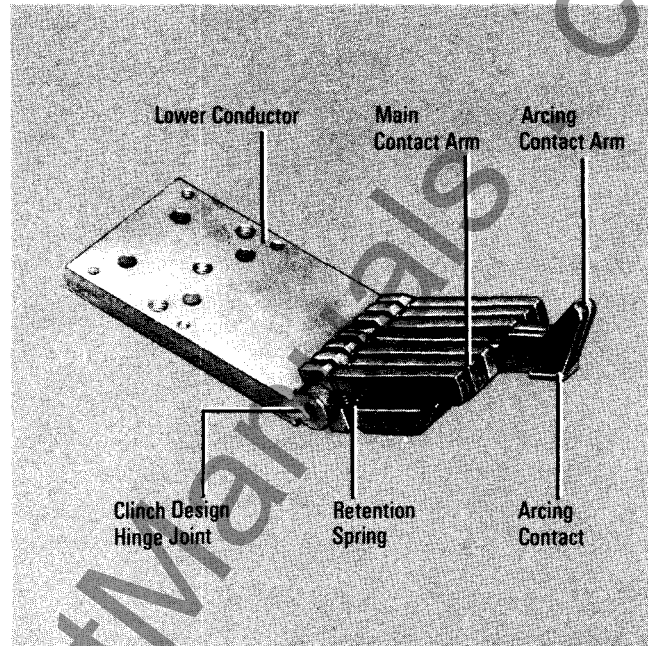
Single Pole Moving Contact Conductor Sub-Assembly (Single Arcer Design).
